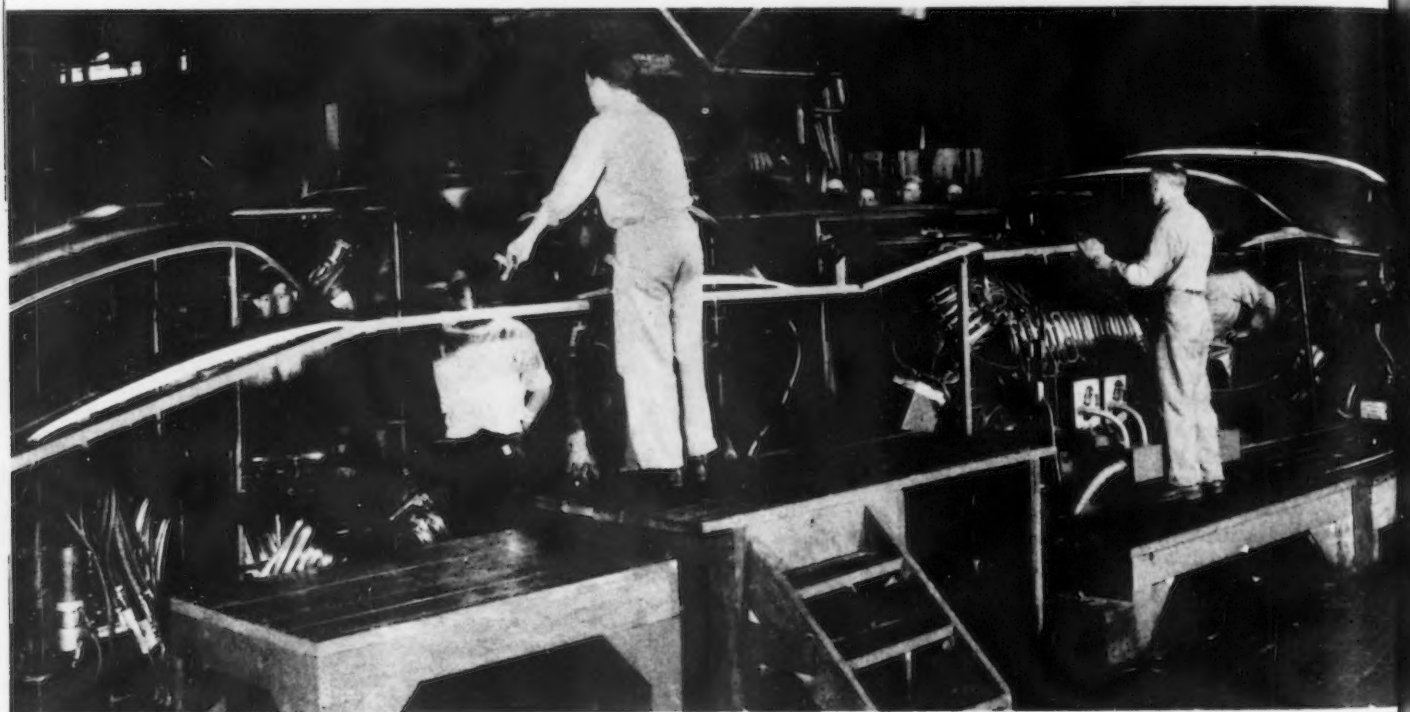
In the welding line for top panels, the parts are shifted by hand along angle iron tracks. Tack welding precedes the spot welding done in a Resistance machine near the center of the line.
